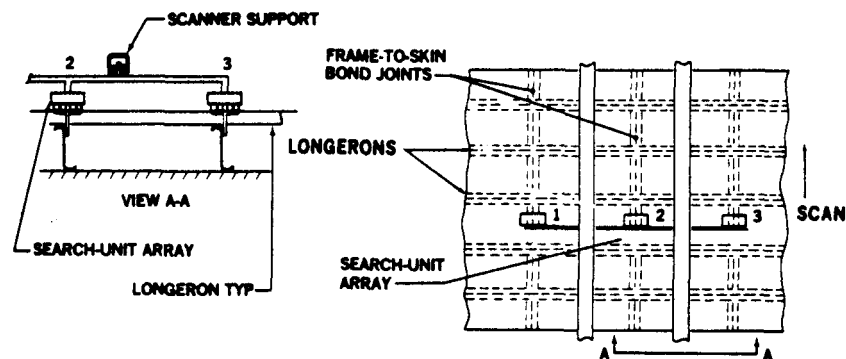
AUTOMATED ULTRASONIC INSPECTION SYSTEM FOR FRAME-TO-SKIN BOND JOINTS
